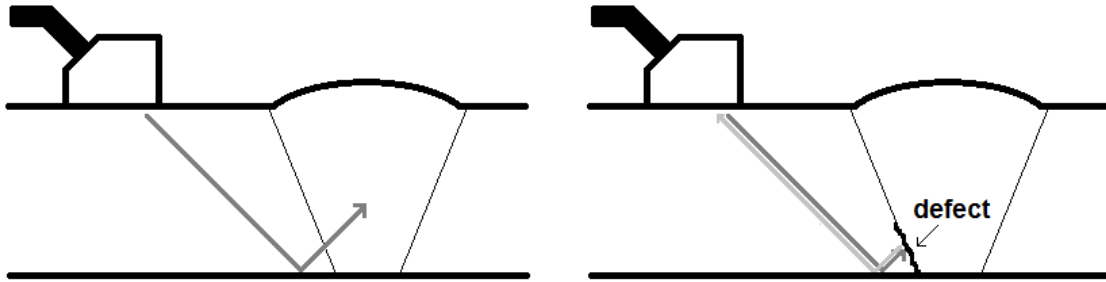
Ultrasonic NDT of a weld joint.
